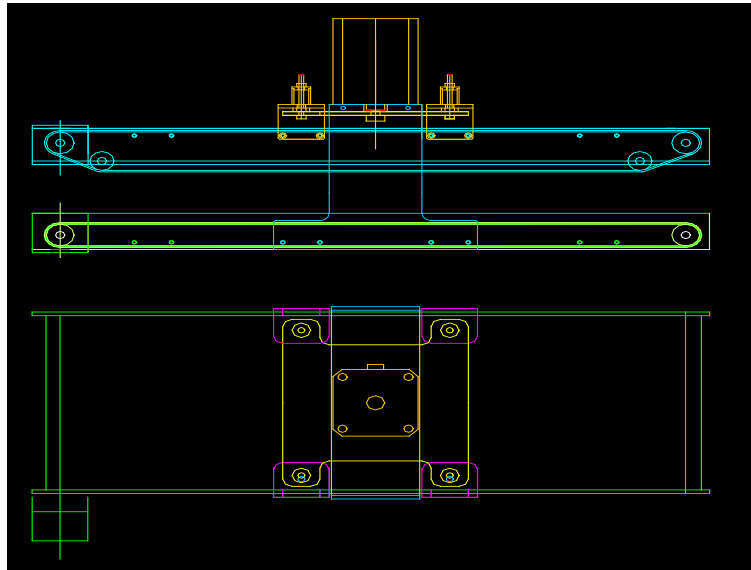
Assembly drawing of the pneumatically operated suspended bridge arrangement
